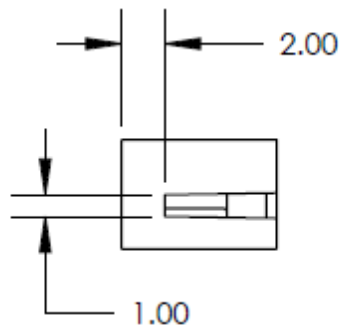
Connector Plug Mechanical Drawing – End View (showing latch slot)
